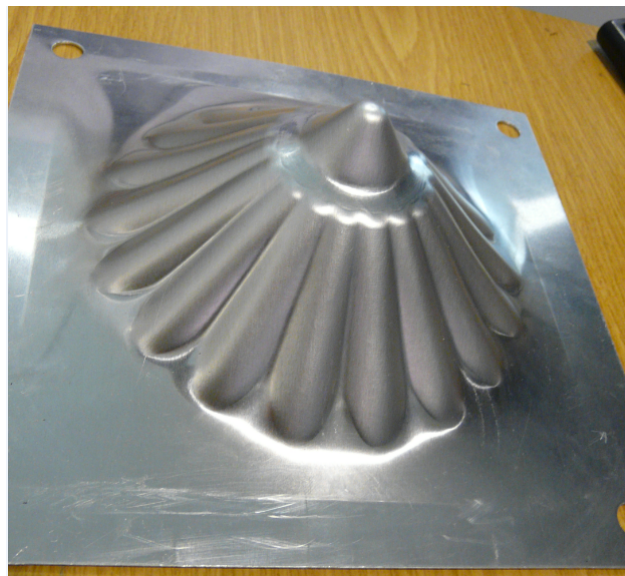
Another example in a 1 millimeter thick aluminum sheet.
